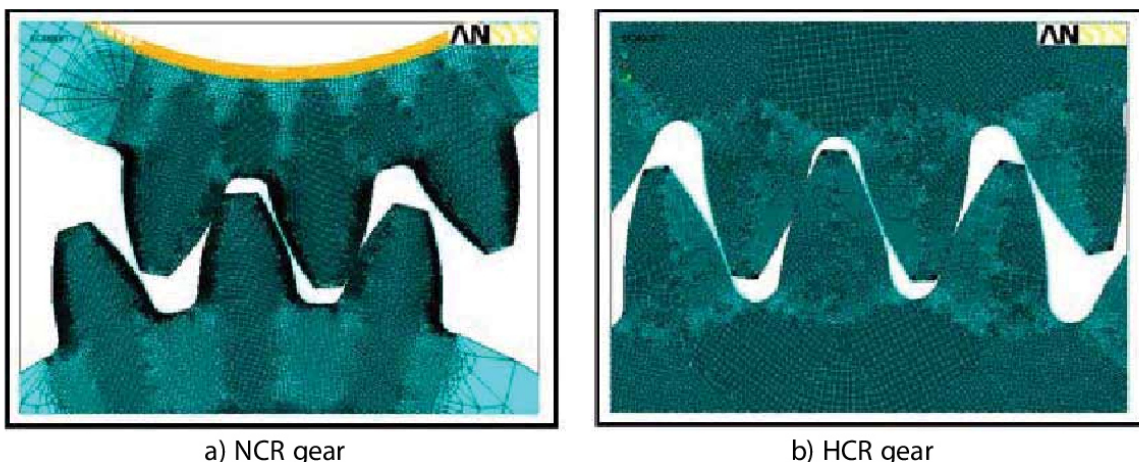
Typical appearance of standard NCR (left) and HCR (right) gearing [33].
